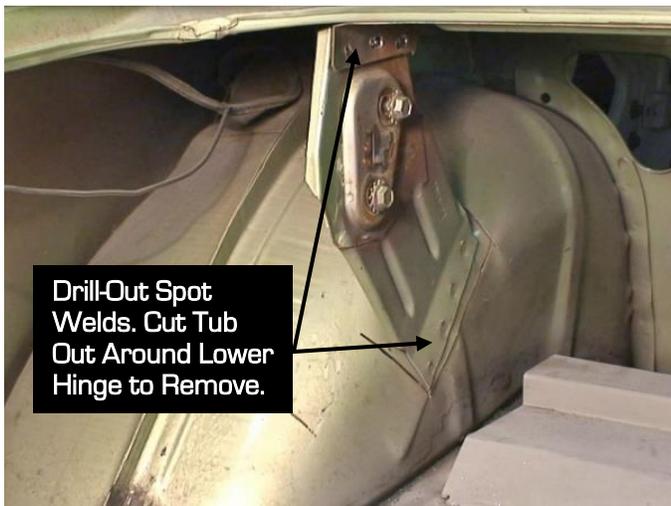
Remove Seat Support & Decklid Hinge (Coupe)
